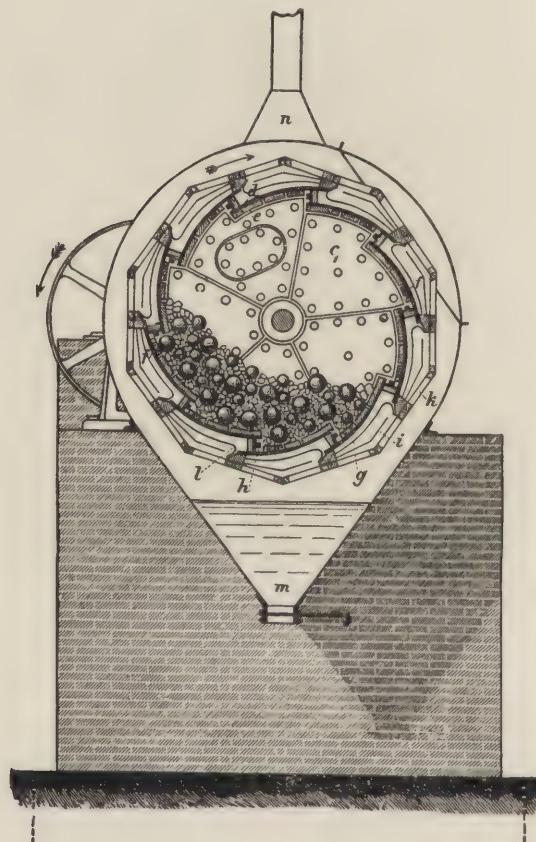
Ball mill, section showing grinding plates and sieves.
